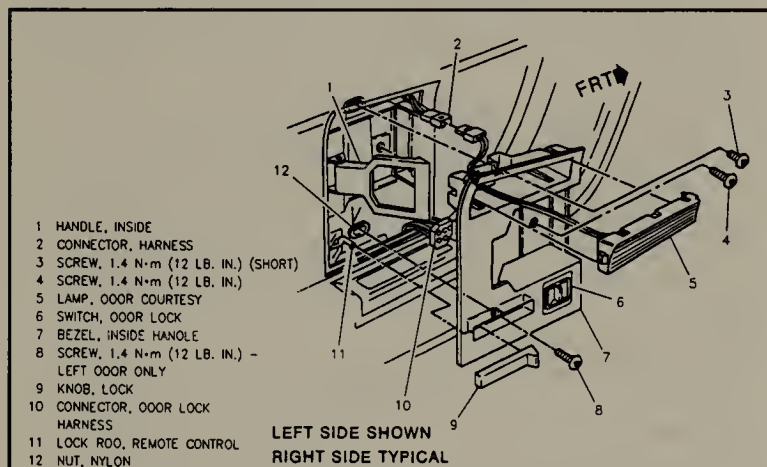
Exploded view of the inside handle bezel—1996 vehicle shown, others similar
